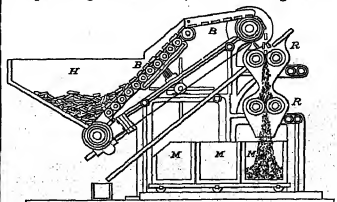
Breaking-down machine. H, hopper; B, endless band; R, rollers; M, boxes to receive meal.
